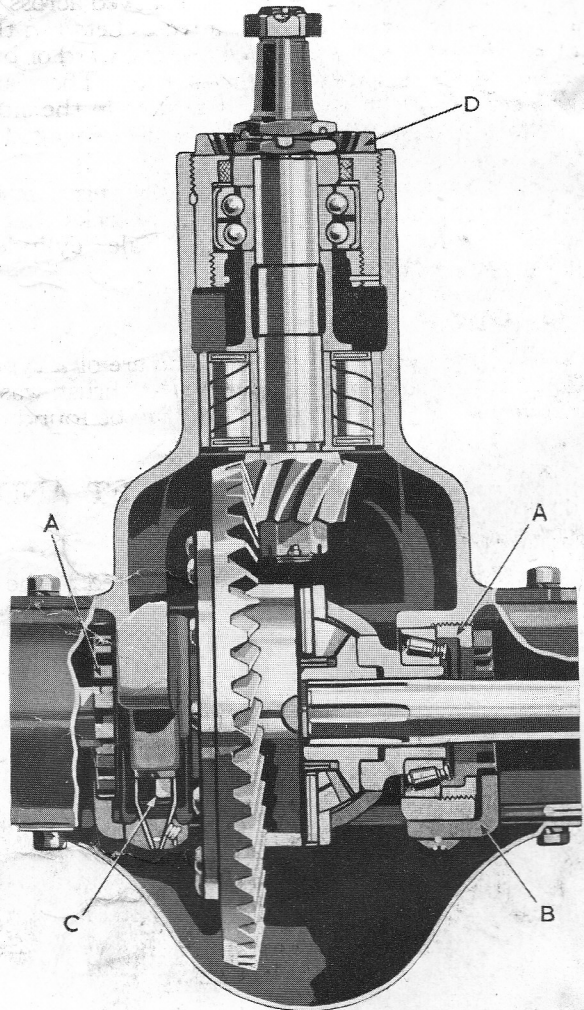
SECTIONAL VIEW OF DIFFERENTIAL CARRIER ASSEMBLY
